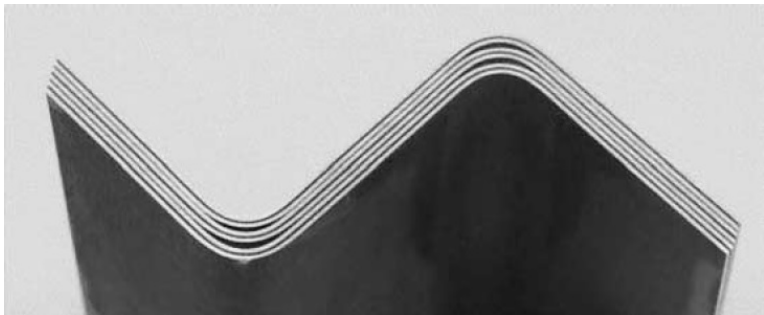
GLARE stringer built by stacking of the alternatively manufactured three-layer laminates [17]
